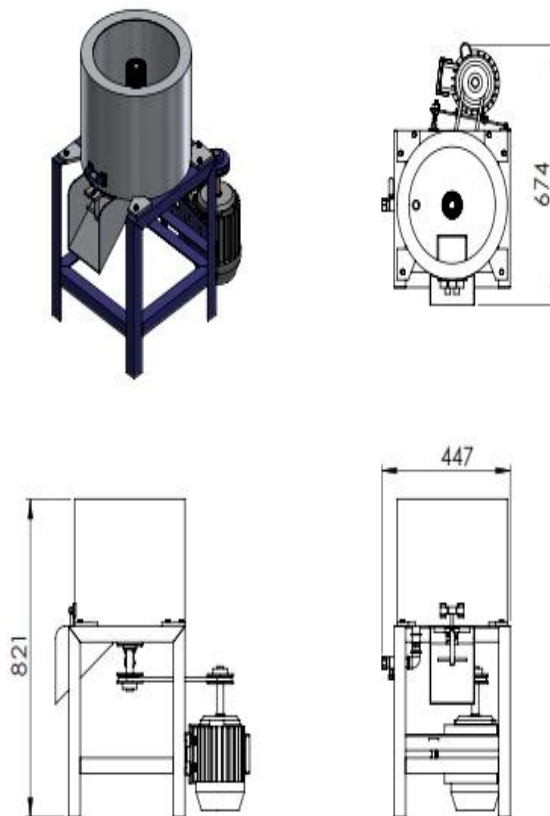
Blue print design of cilembu sweet potato machine with electric motor
